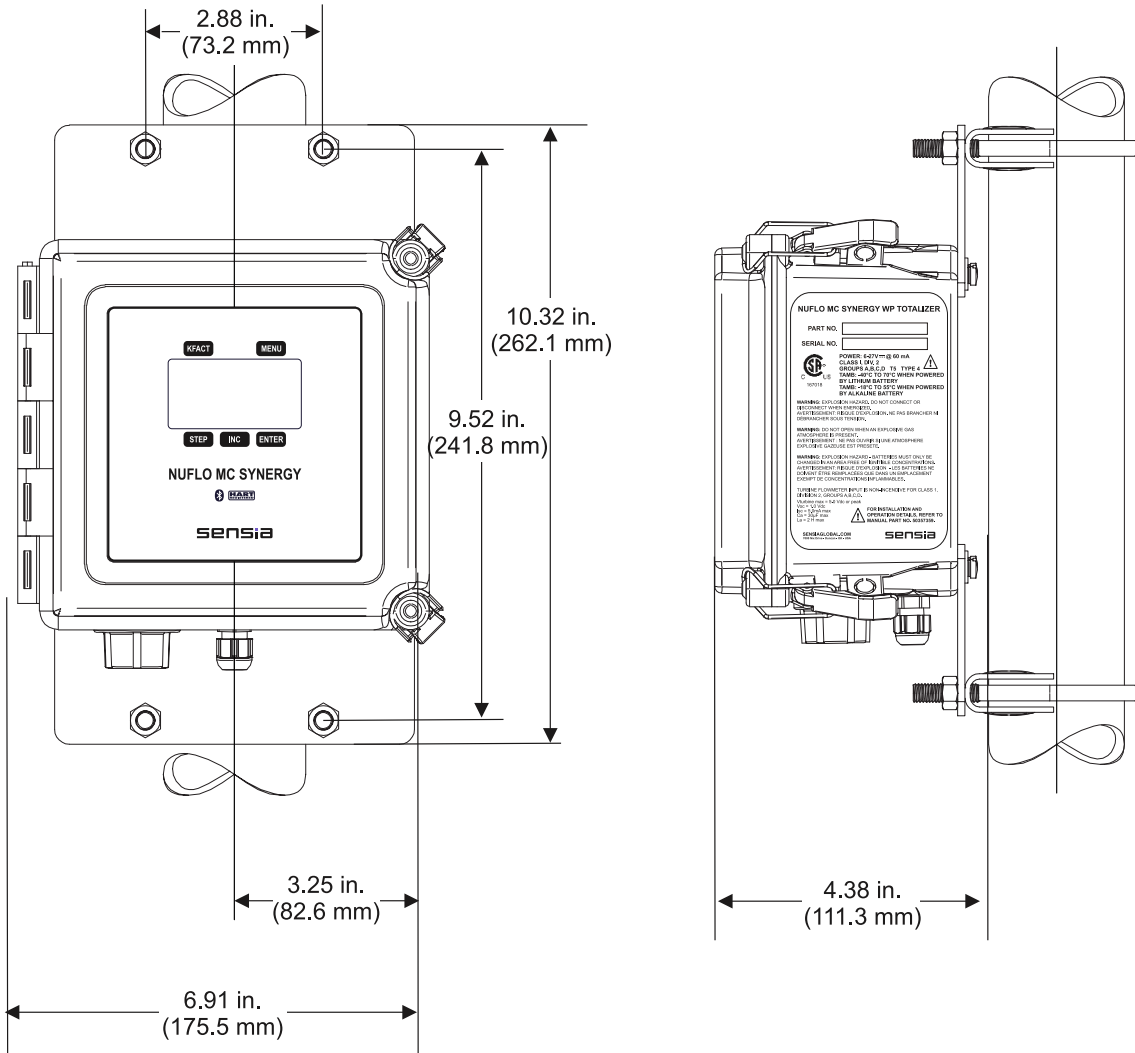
Typical mount dimensions in inches (millimeters) for remote-mount installation on vertical pipe
